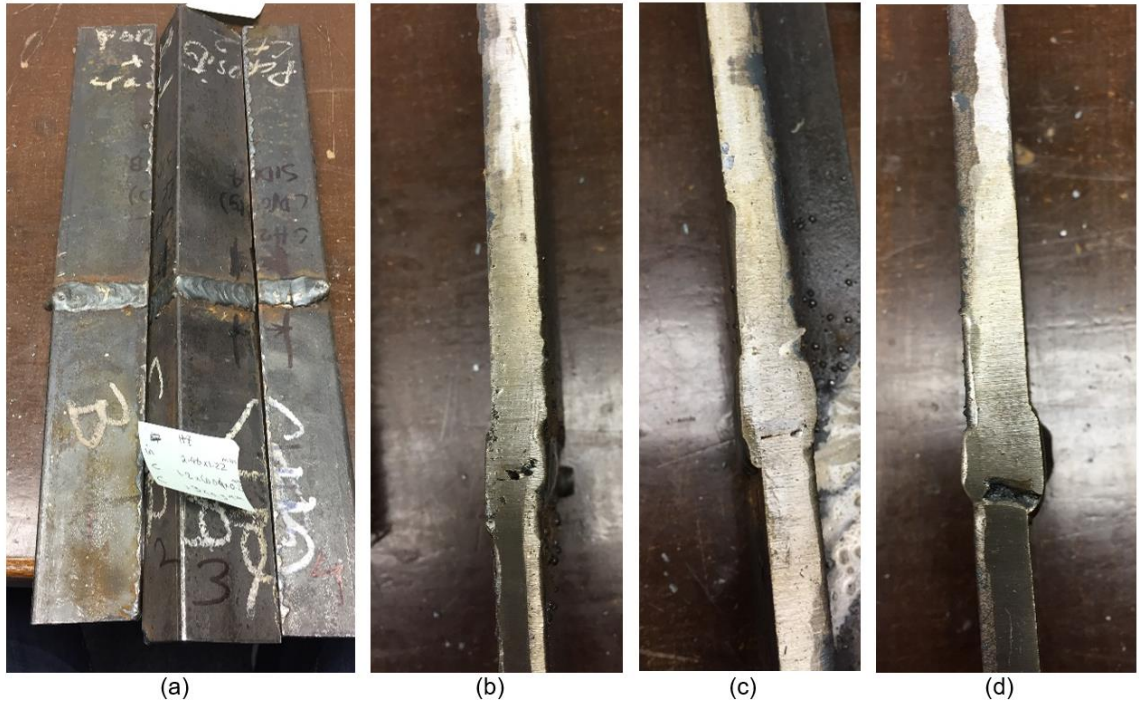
Specimens CH1A and CH1B (a) cutting, (b) inclusion (c) crack, (d) inclusion
